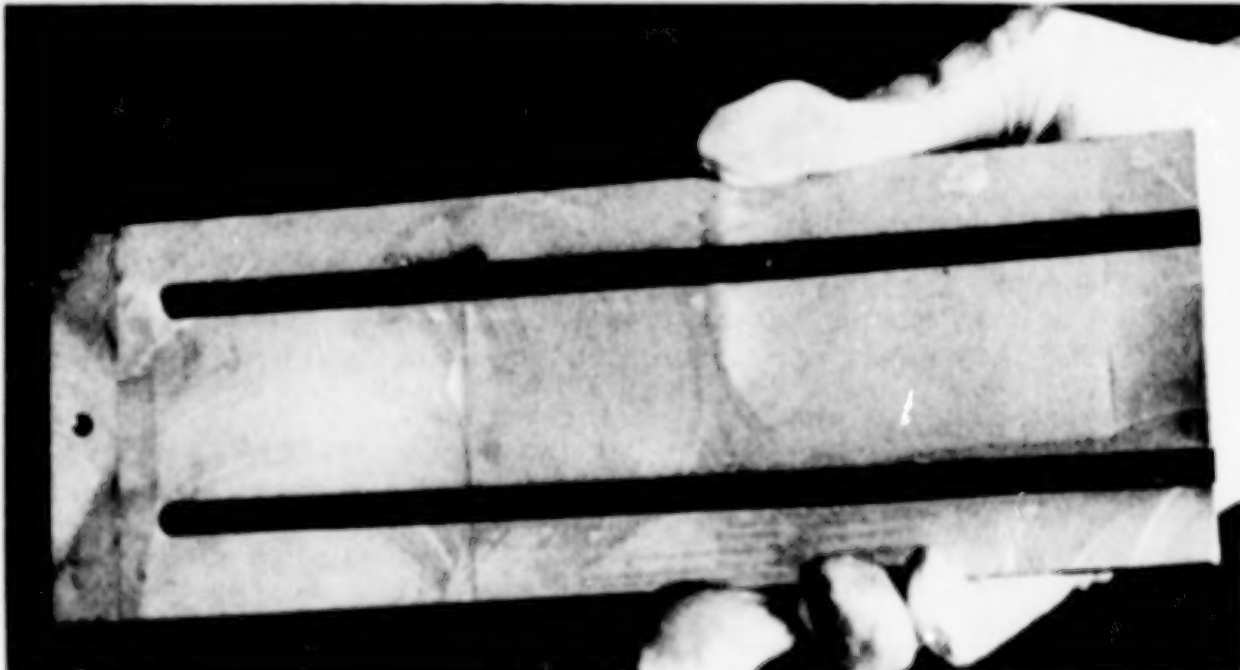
Example of explosively fabricated, monolithic prototype showing a milled section exposing superconducting channels in Al-6061-T6 tooling plate.
